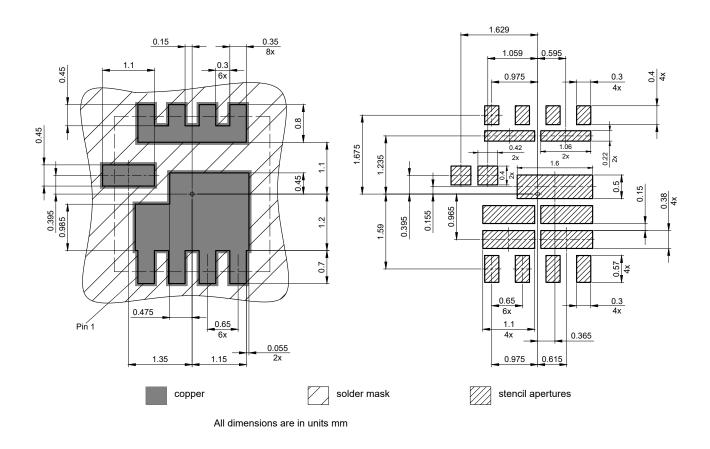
Outline Footprint (PG-WHTFN-9-1), dimensions in mm
